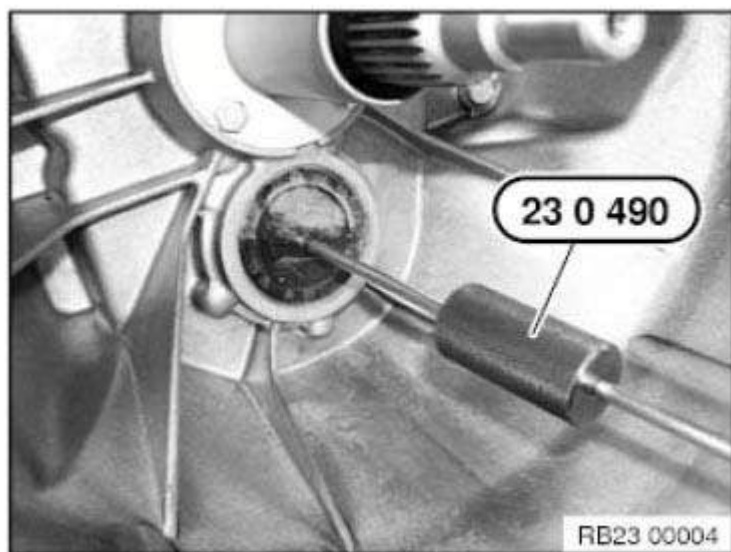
Turning Sealing Cap Using Special Tool (23 0 490)
